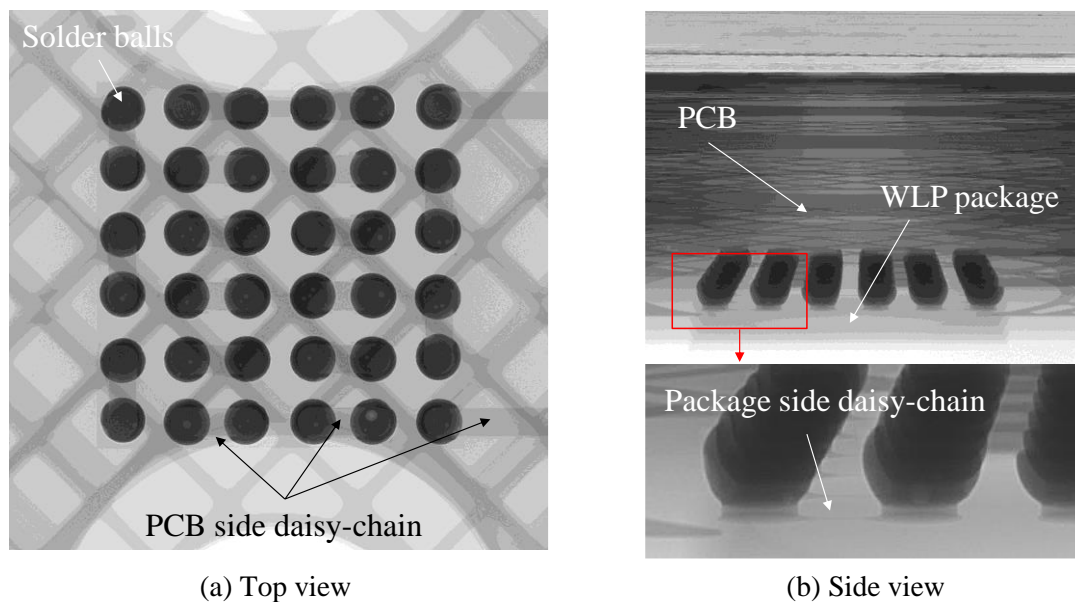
Package daisy-chain of the sample used in our shear test bench revealed with X-Ray inspections: (a) top view and (b) side view
